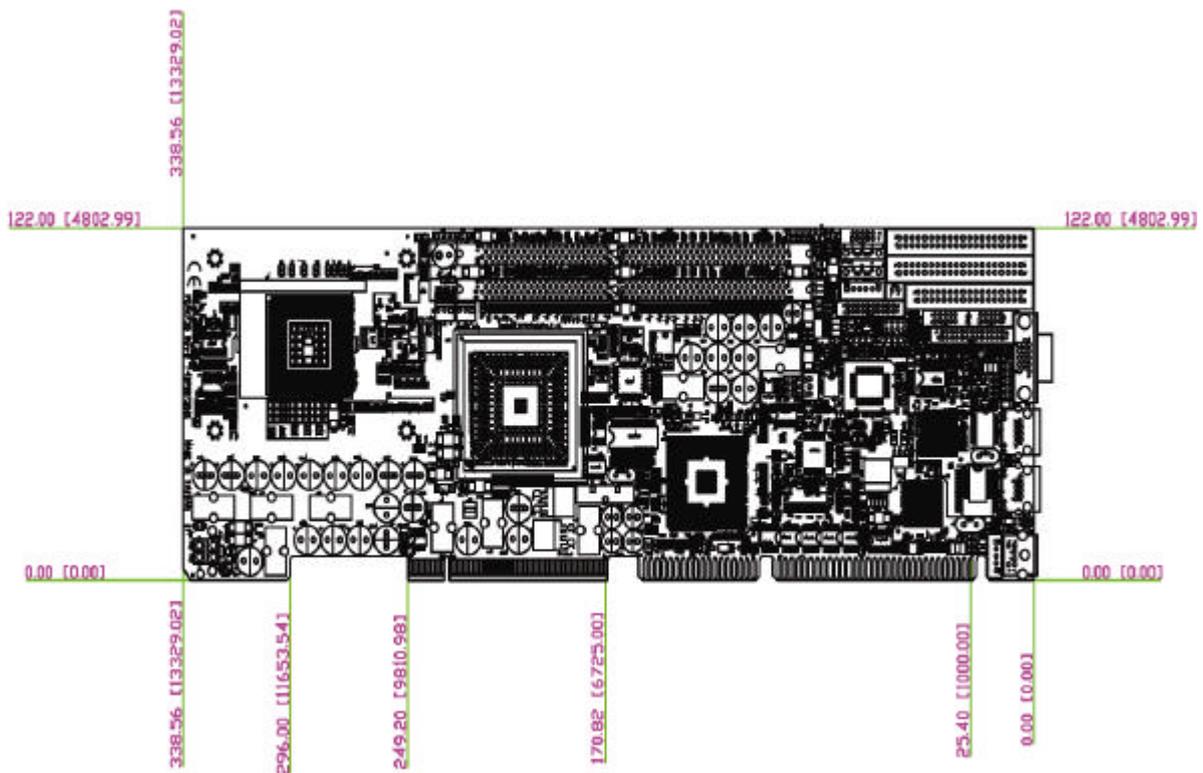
Mechanical Drawing of PEAK 735 Series
